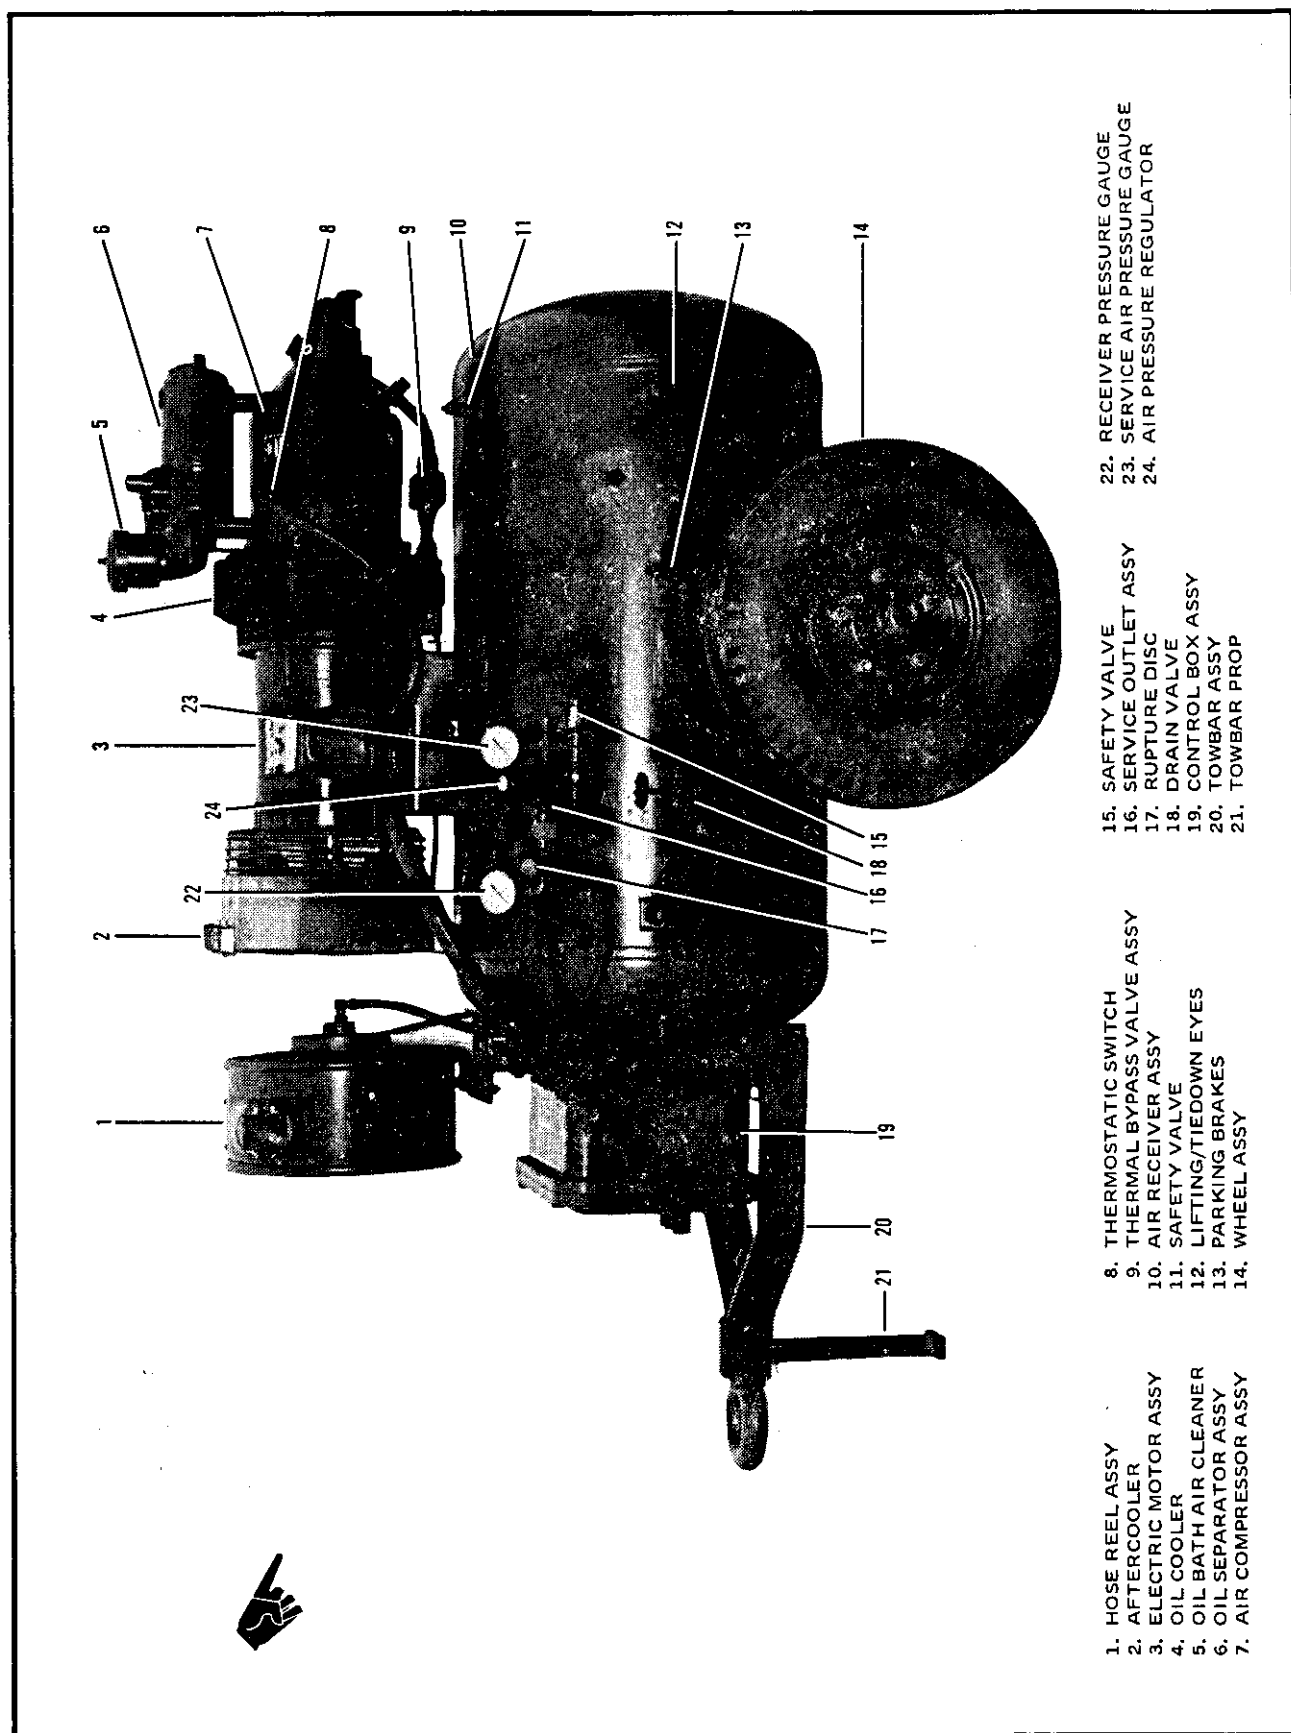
Major Components of the Type MB-2A Air Compressor
